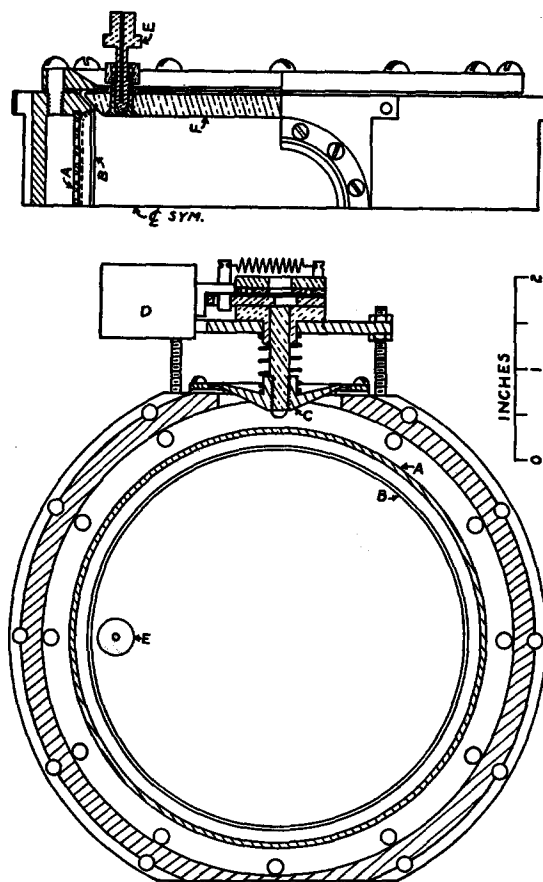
Sectional drawing of radial cloud chamber showing main construction features.
